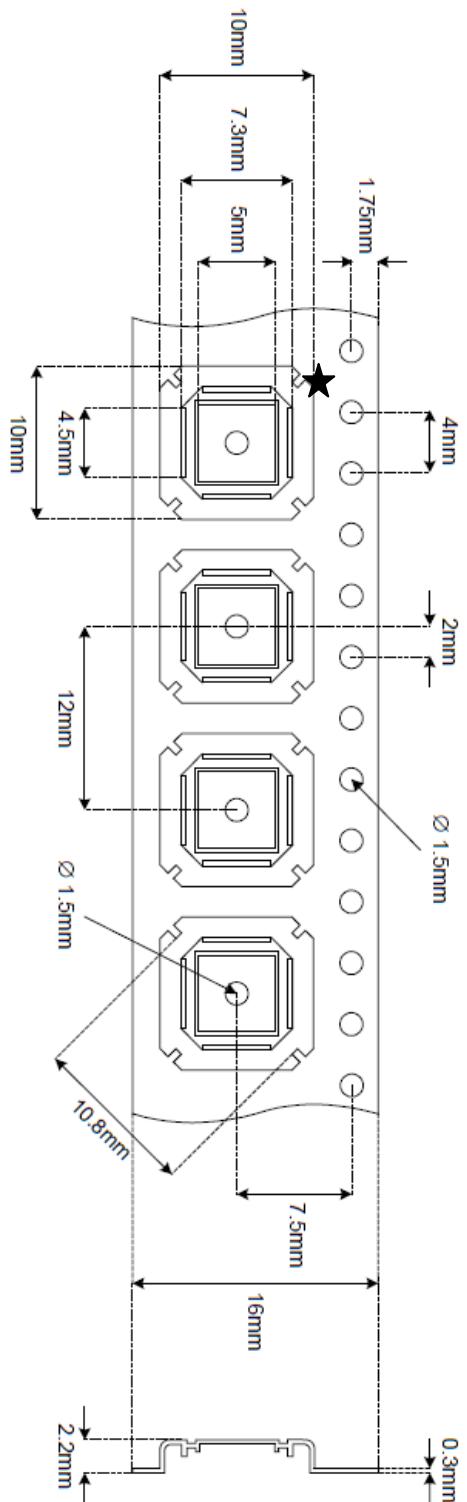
FT232BL, FT245BL and FT2232D Tape Dimensions
